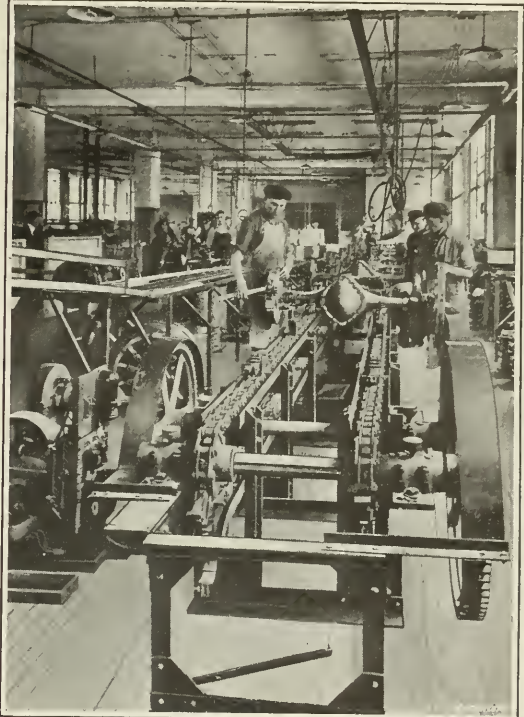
The Palmer-Bee Co. of Detroit, Mich., makes a specialty of designing and installing time- and labor-saving equipments for handling material in course of manufacture. This illustration shows an outfit installed by this company for assembling automobile transmissions. Two strands of endless chain carry brackets which support the work at each end
